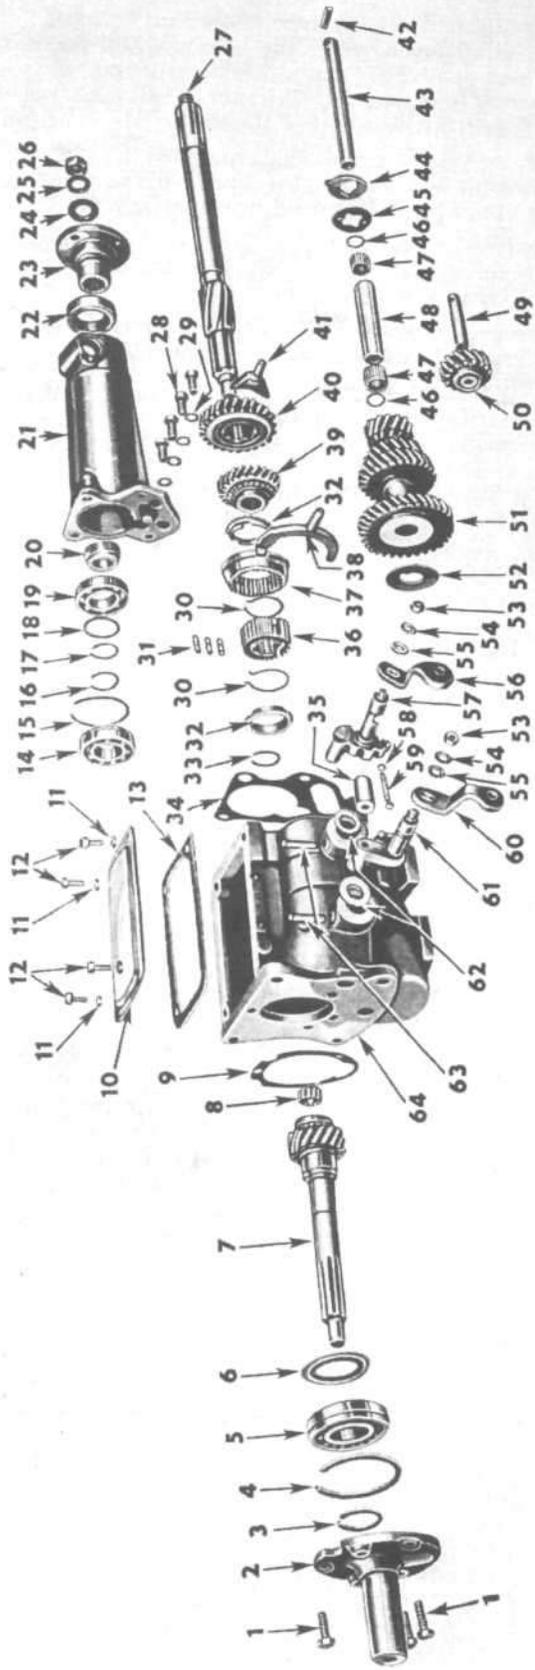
STANDARD TRANSMISSION—2-WHEEL DRIVE—WITHOUT OVERDRIVE
